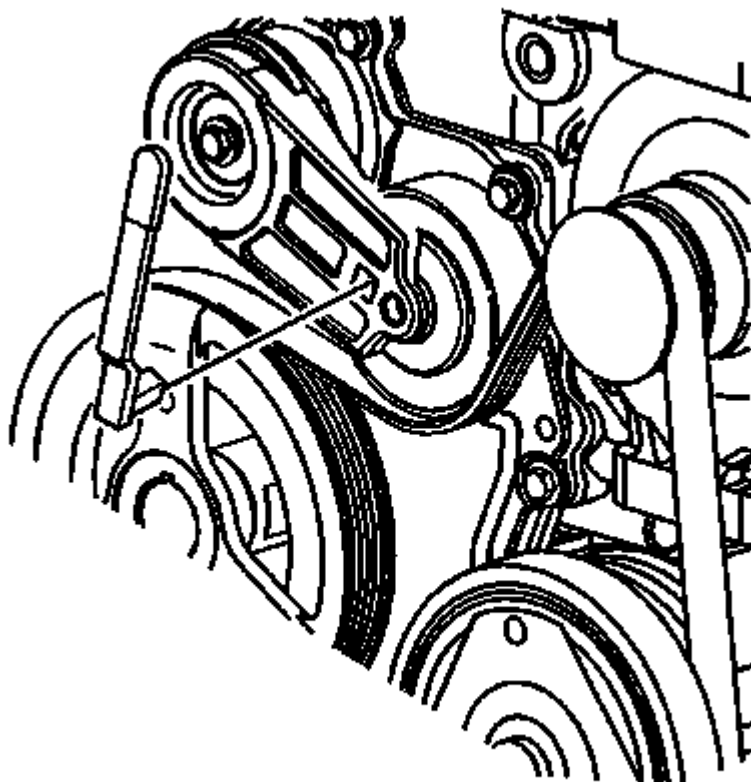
View Of Drive Belt Tensioner & Special Tool
